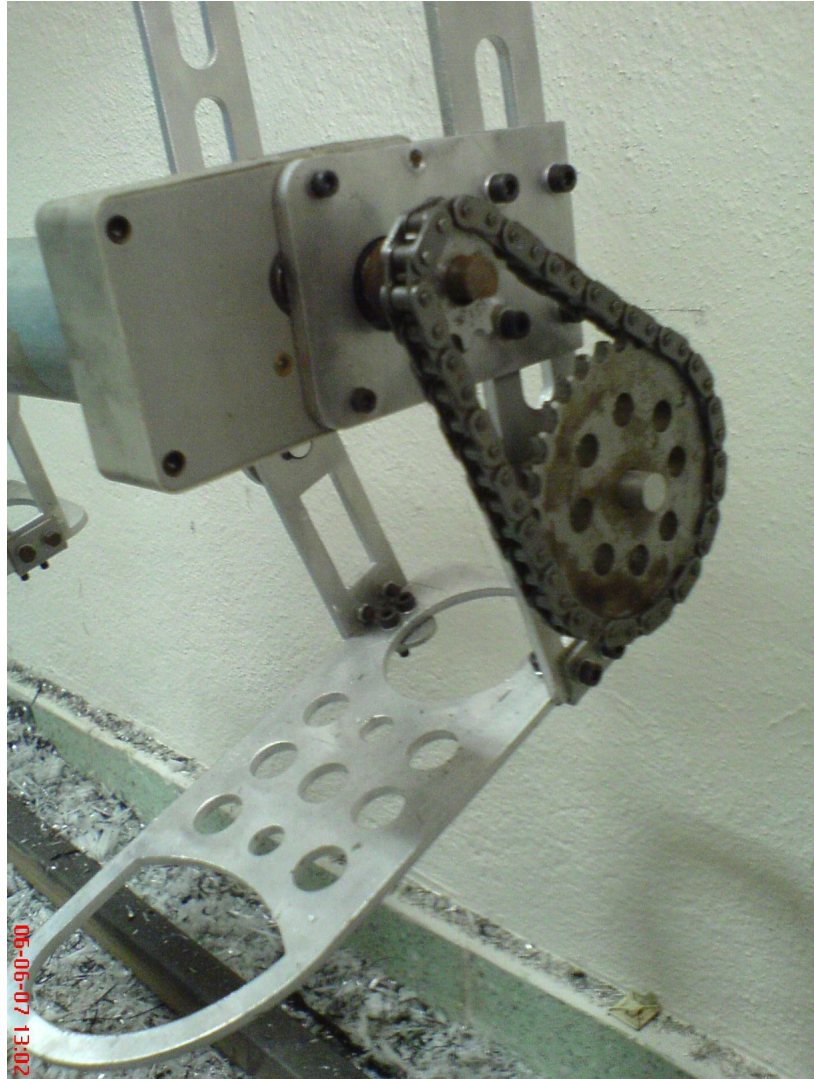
Actuator, gearbox and power transmission mechanisms.
